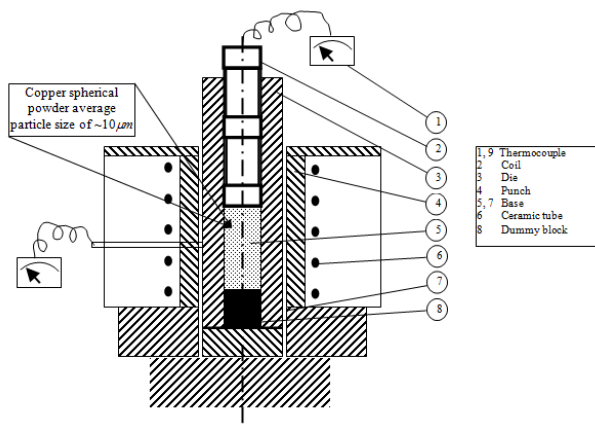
Die setup of the hot compaction powder metallurgy pressing technique.
